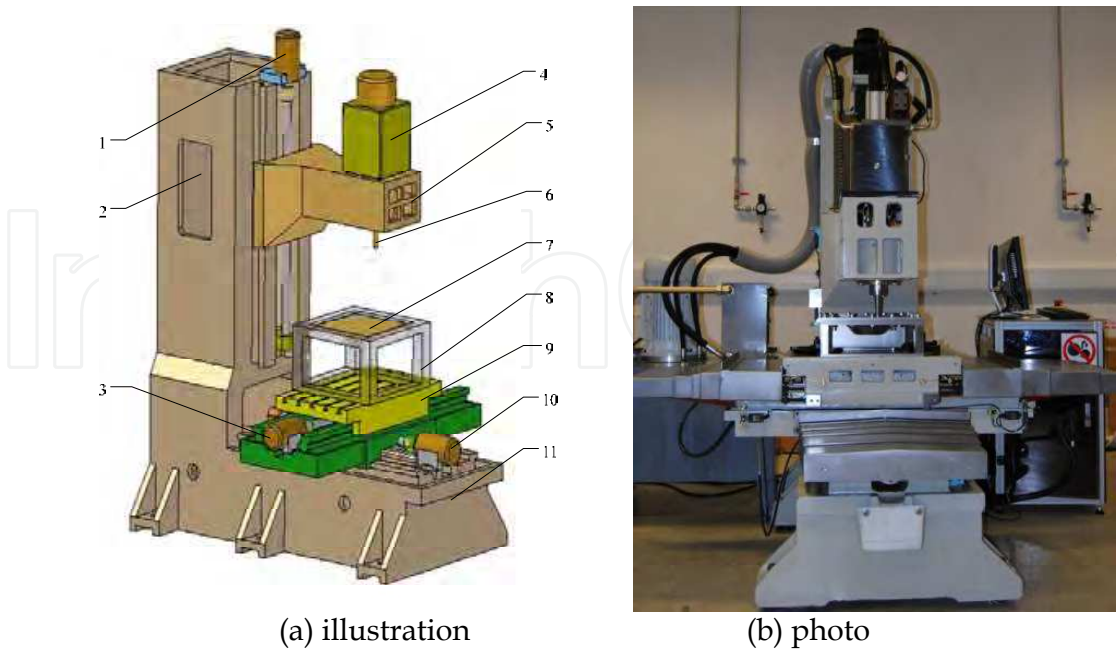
Our ISMF machine, 1 - Z axis servomotor and encoder, 2 - Balancing weight, 3 - X axis servomotor and encoder, 4 - High speed punch head, 5 - Z Slider, 6 - Forming tool, 7 - Workpiece, 8 - Fixture, 9 - X-Y table, 10 - Y axis servomotor and encoder, 11 - Frame.
